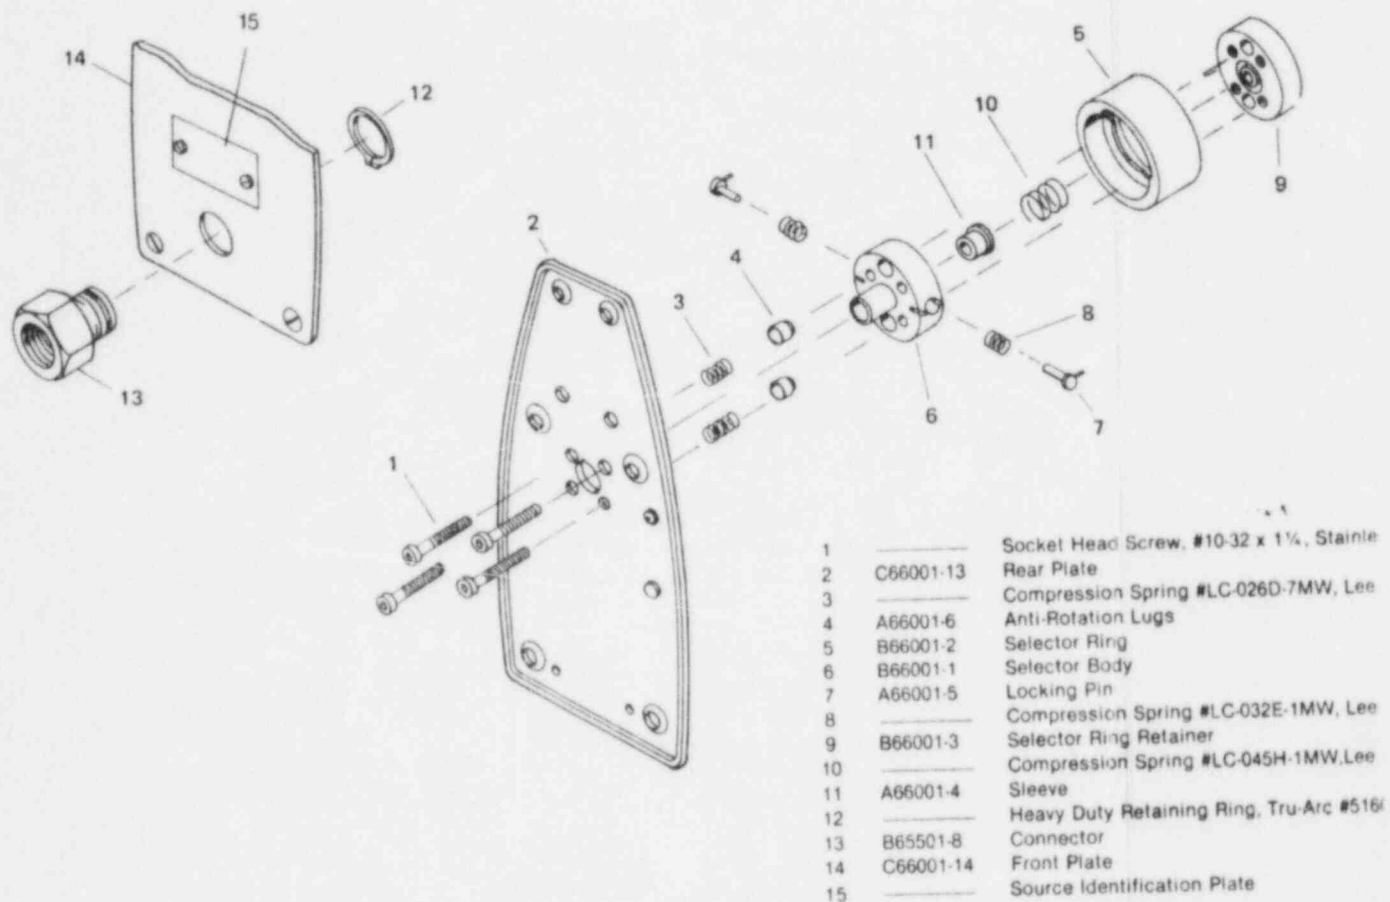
A - Rear End Plate and Control Unit Connector—Exploded View
